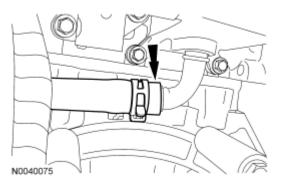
Locating Bypass Hose To Coolant Outlet Courtesy of FORD MOTOR CO.
